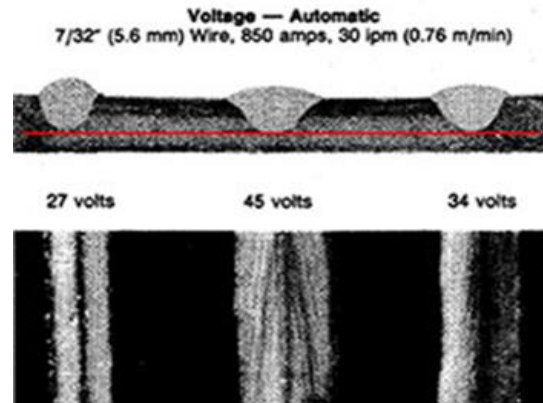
Welding penetration and weld bead shape using different voltage
